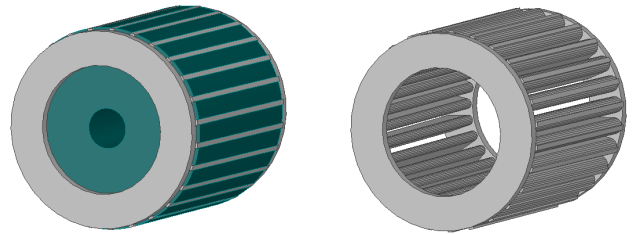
Detail of the Rotor Geometry and Skewed Squirrel Cage.
